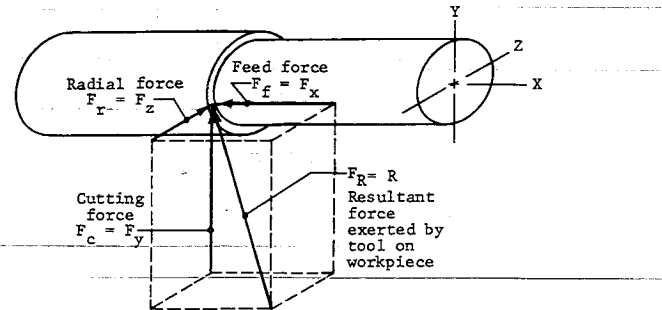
Rectangular components of tool force acting on workpiece in turning operation.
